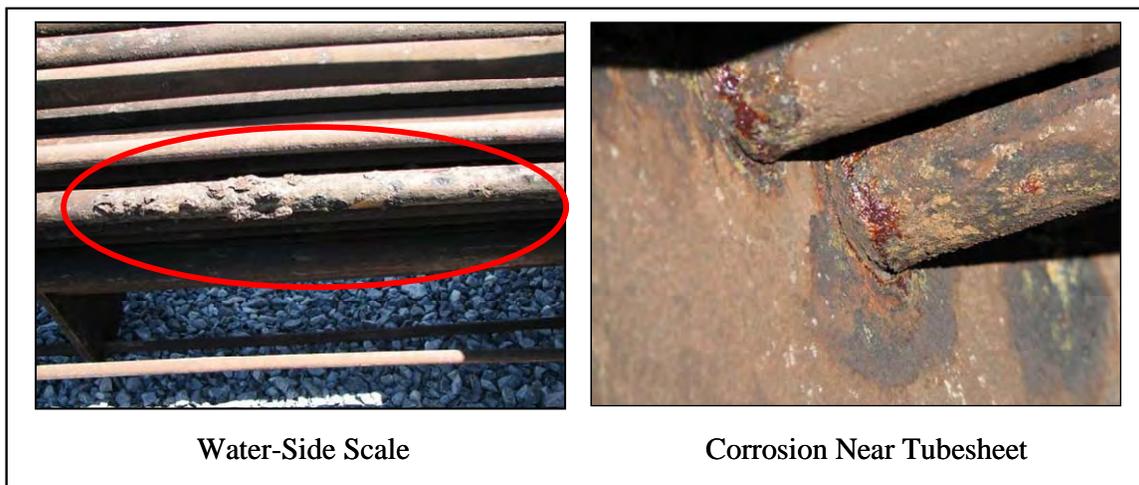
Post -TC24C Inspection of Secondary Gas Cooler.
